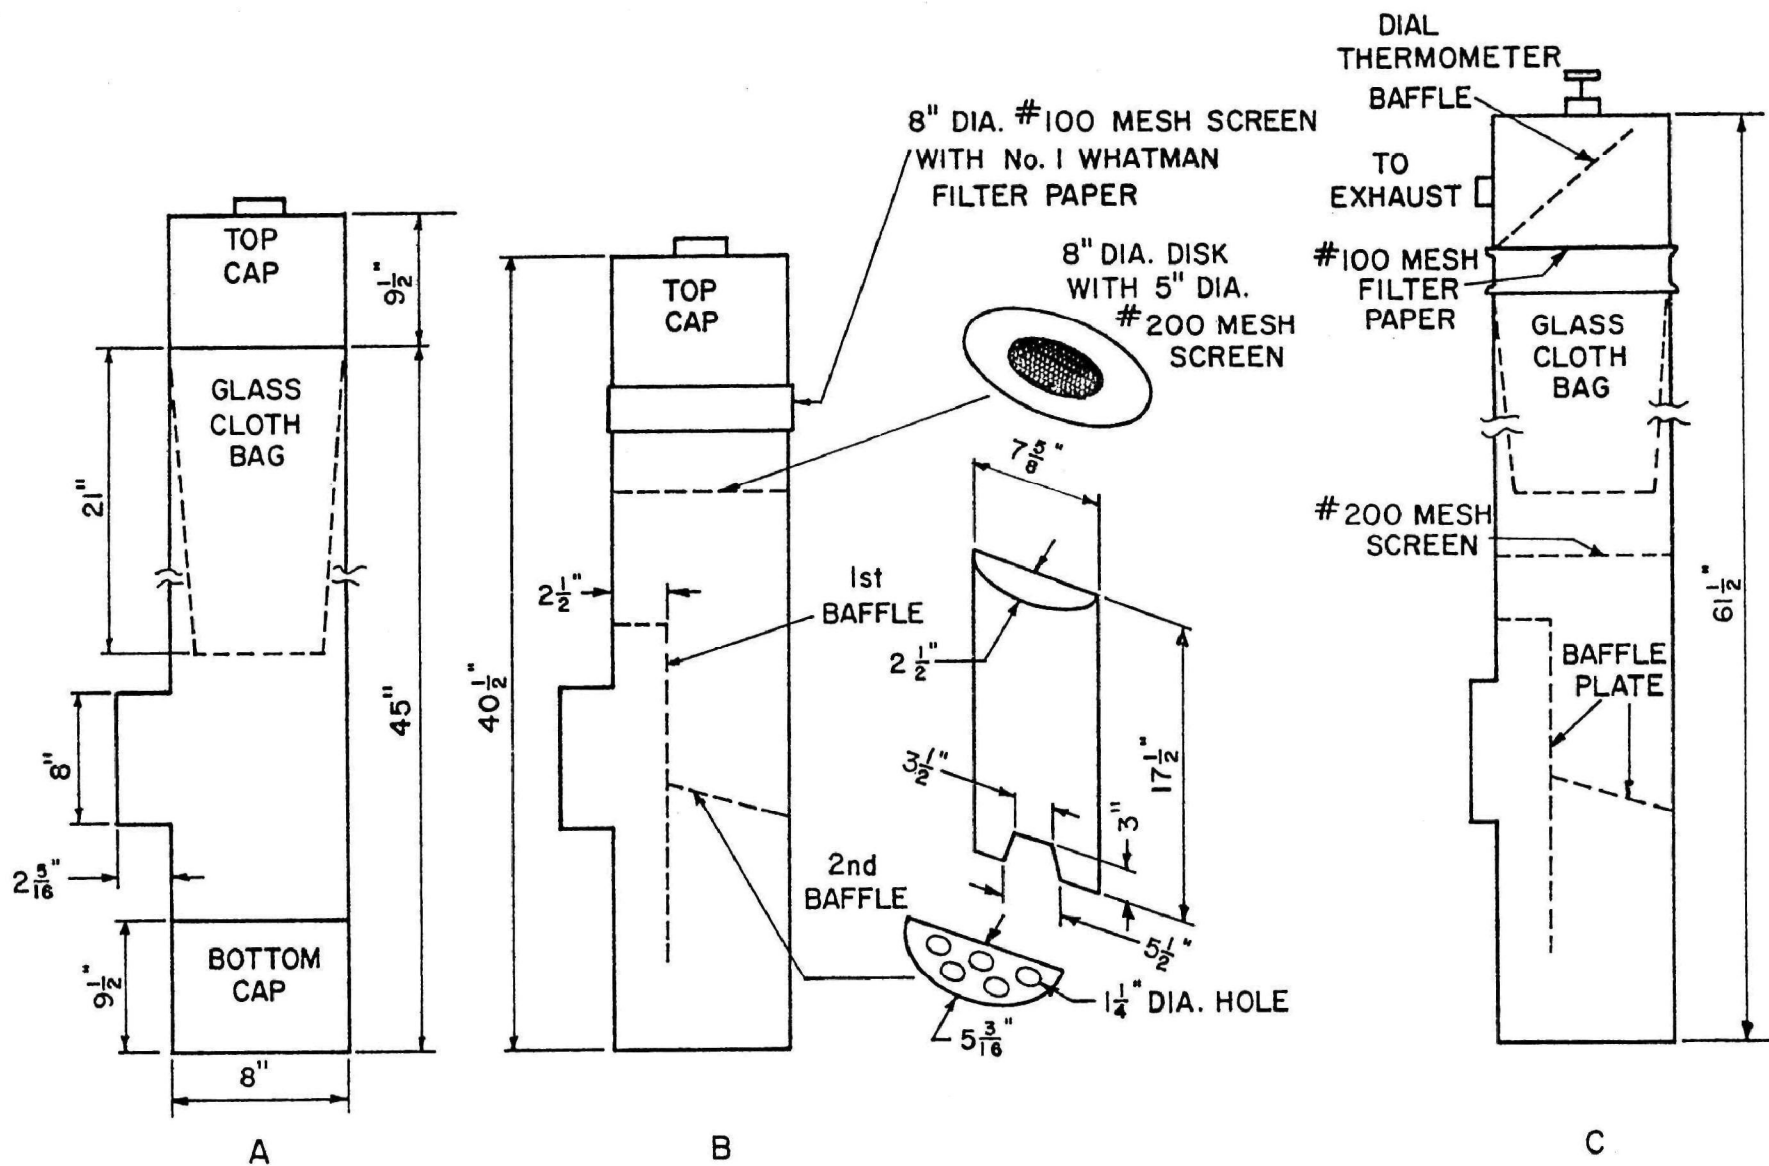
EXHAUST STACK ARRANGEMENTS
